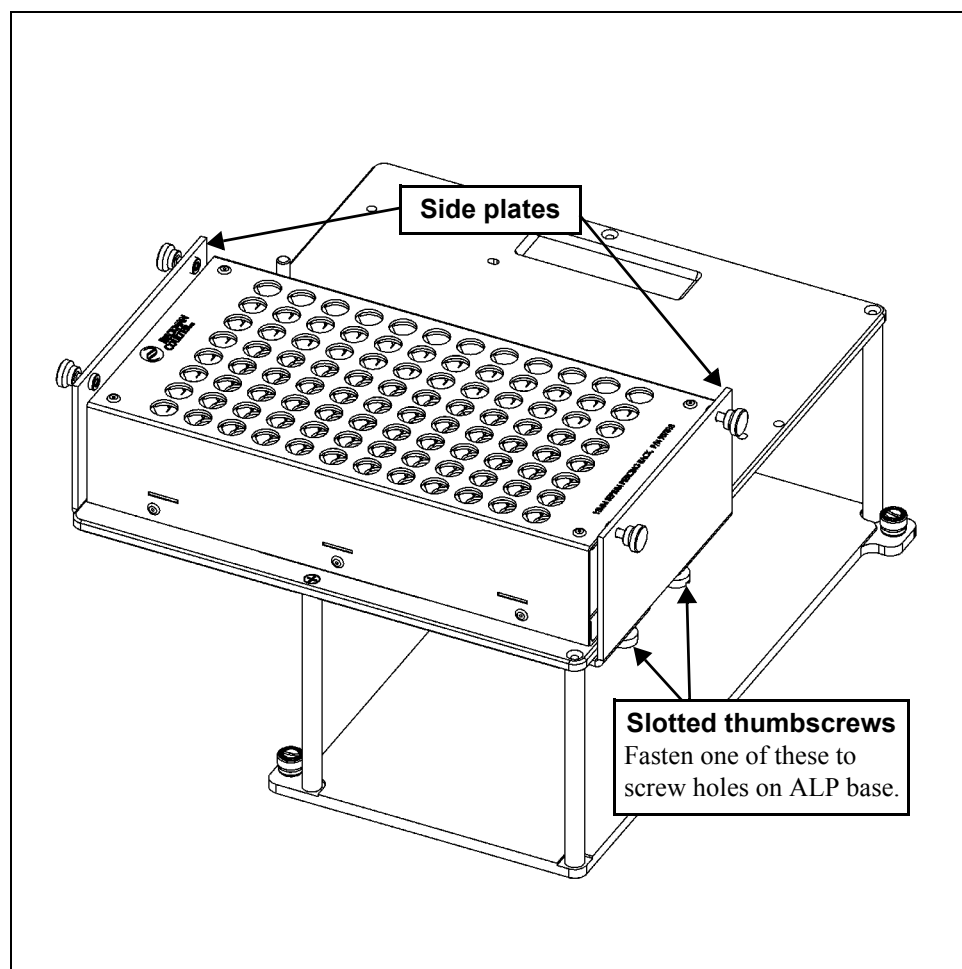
Septum Piercing Tube Rack with side plates (left facing)
